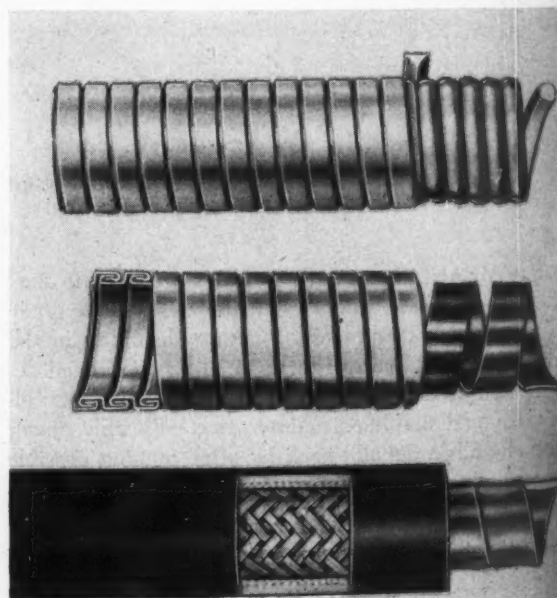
Power drive casings. Top—General purpose. Center—Heavy duty. Bottom—Heavy-duty portable
